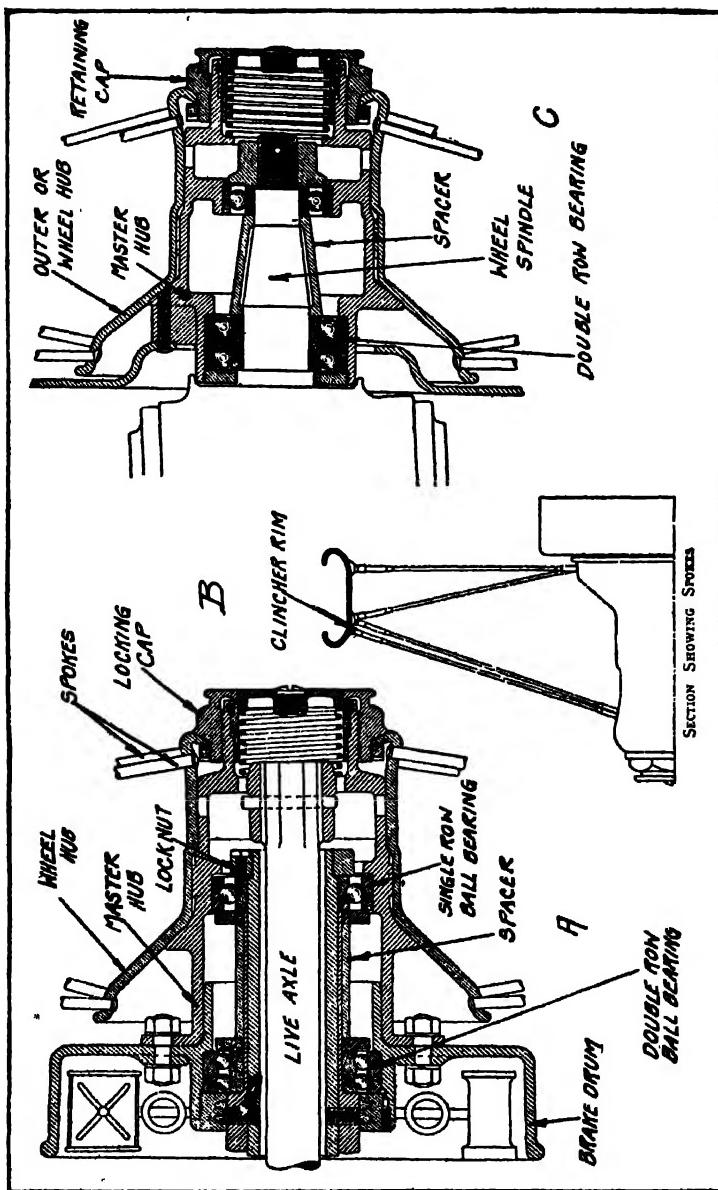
Sectional View Showing Construction of the Dunlop Quick Detachable Wire Wheel.
